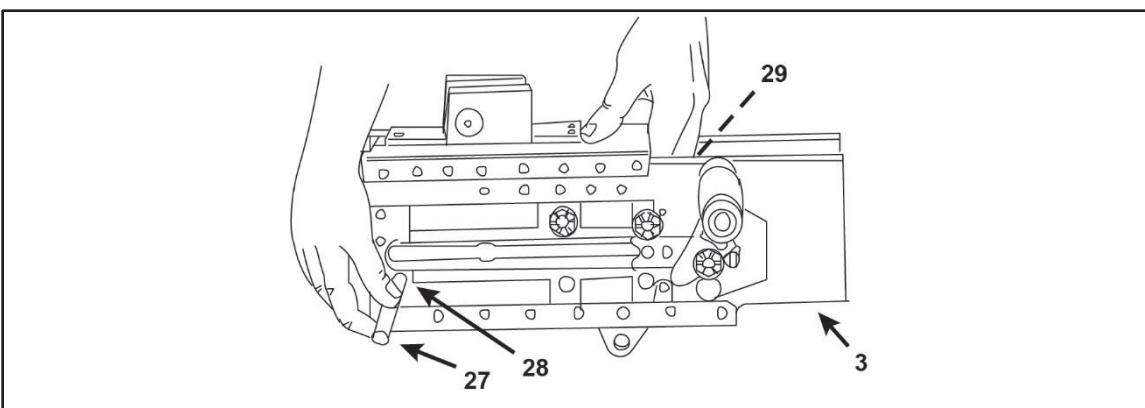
Removal of the sear slide, sear, and sear spring
